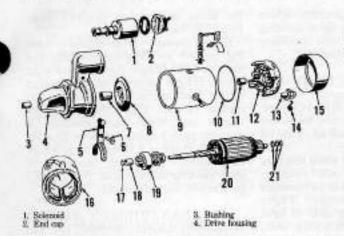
Exploded view of Bosch starter showing com-ponent parts and their relative positions.
